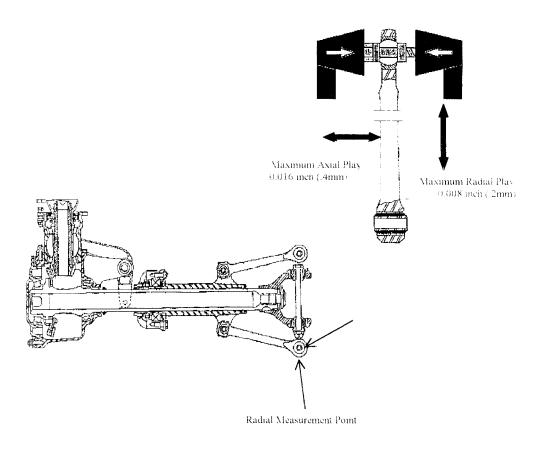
Play Measurement on Tail Rotor Pitch Control Rod
